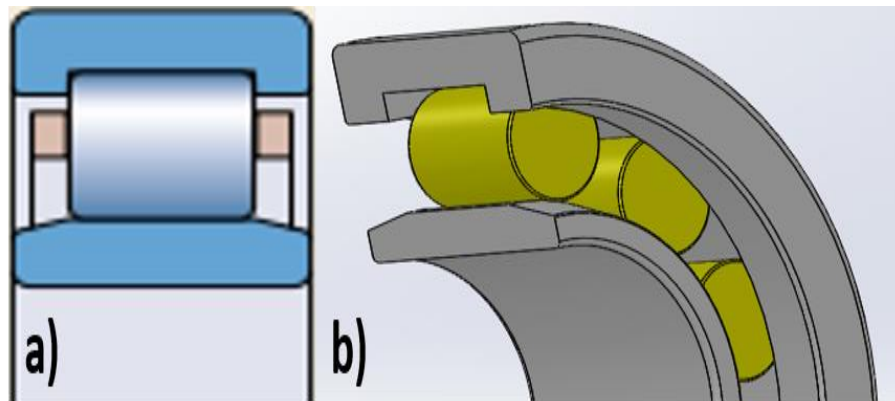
a) Cross-sectional view of a cylindrical roller bearing type 'NU' Specification b) by Solid works.
